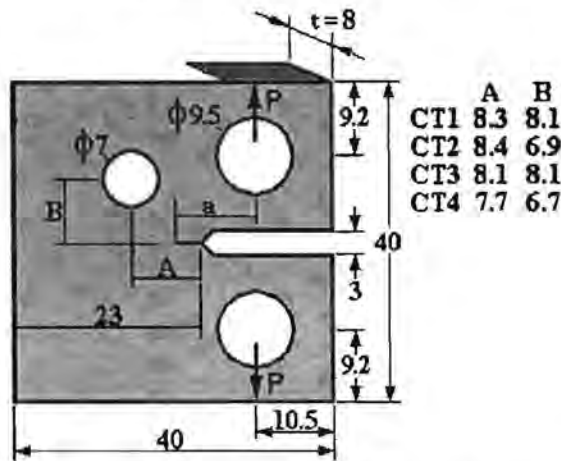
Geometry of the modified CT specimens (dimensions in mm).
